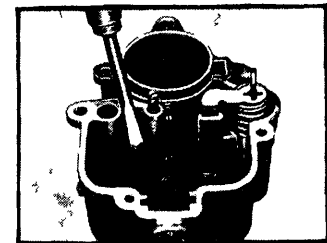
Install step-up jet and gasket. Early 1935 and prior models used step-up valve
